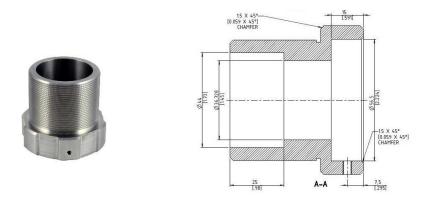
Flange adapter to allow Endurance® to mount to MF-7 (E-MFA-7)
